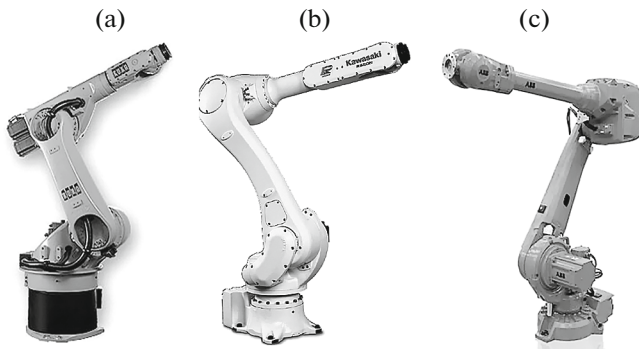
Six-axle robots: (a) KUKA KR 60 HA (Germany); (b) Kawasaki RS060N (Japan); (c) ABB IRB 4600-60/2/05 (Sweden).
